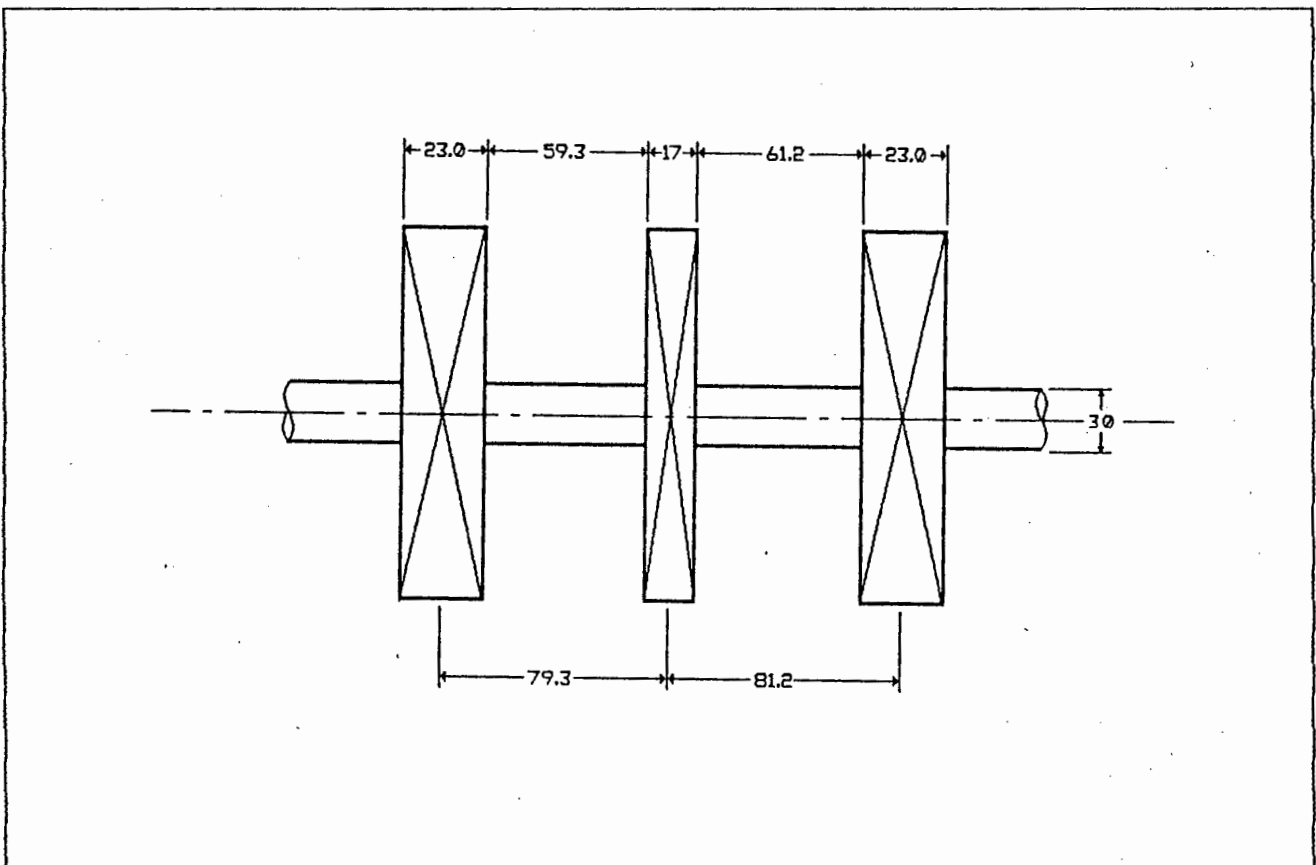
DIMENSIONS OF THE SHAFT AND BEARINGS FOR CALCULATING THE MAXIMUM SHAFT STRESS
